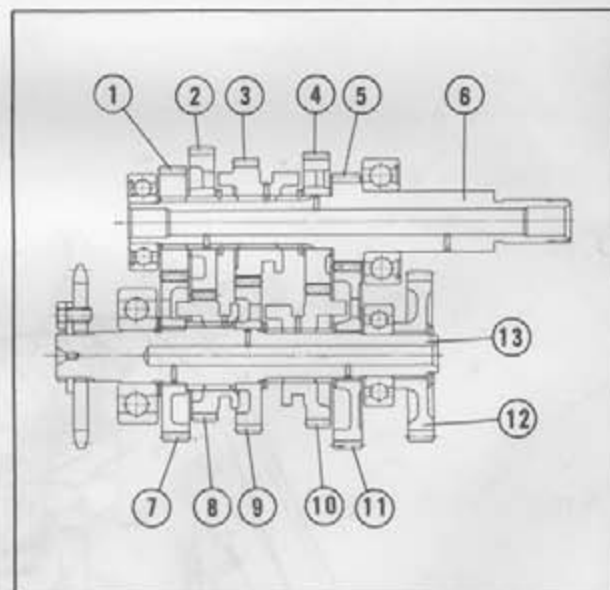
① M2 gear (21) ⑧ C5 gear (23)
